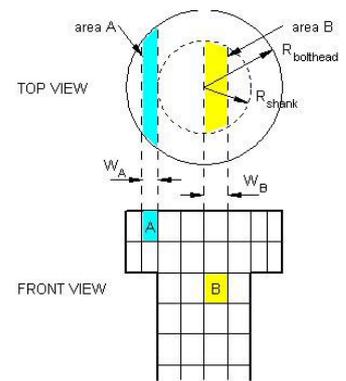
Cross-sectional views of the bolt head and the shank [11]
